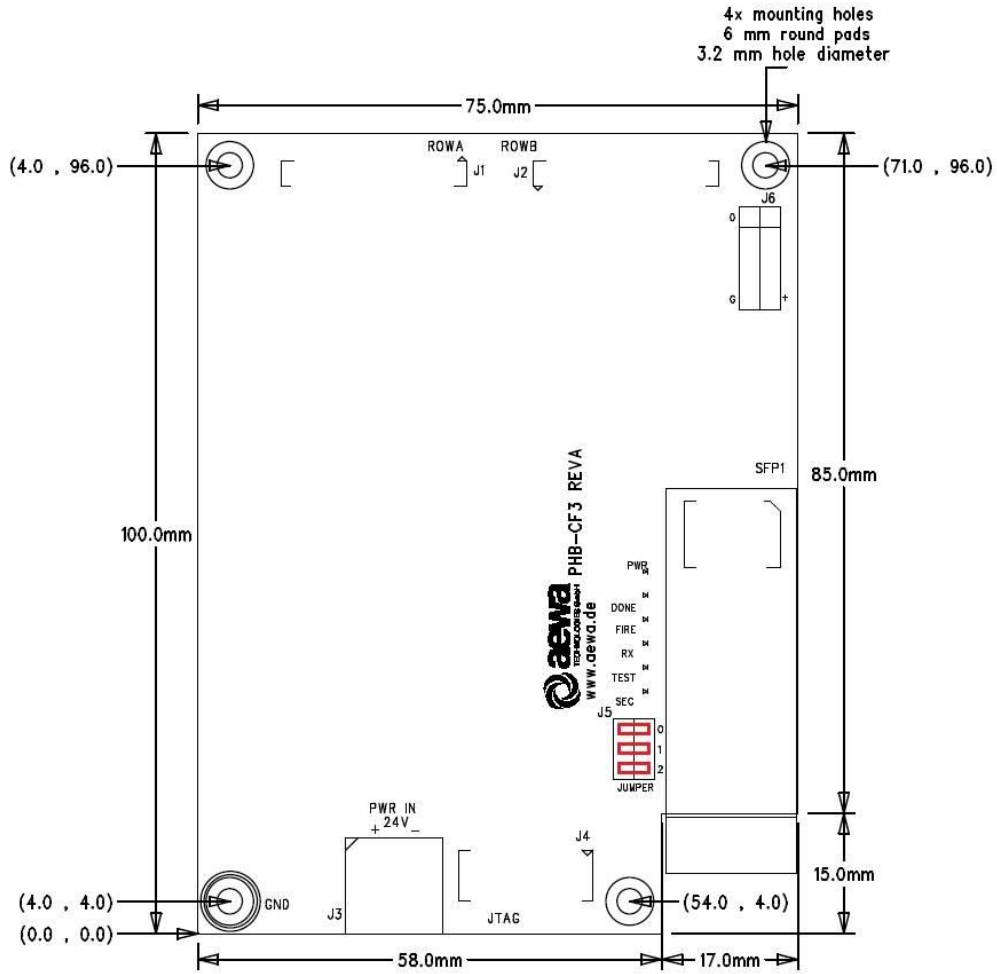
PHB-CF3 MECHANICAL DIMENSIONS
